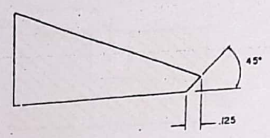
Dimensioning a chamfer on edges less than 90°
